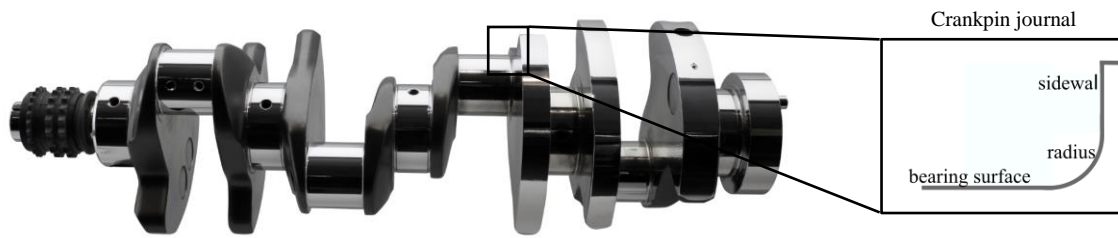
Crankshaft with highlighted pin journal and its geometrical features (Reprinted with permission of Element Six).
